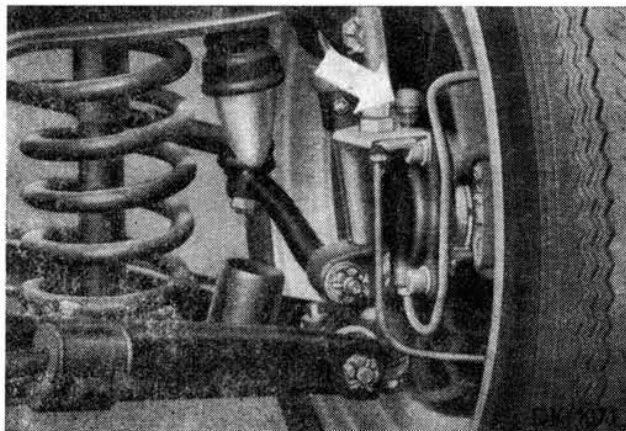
/2 - Bleeding Screw of Front Axle Brake
